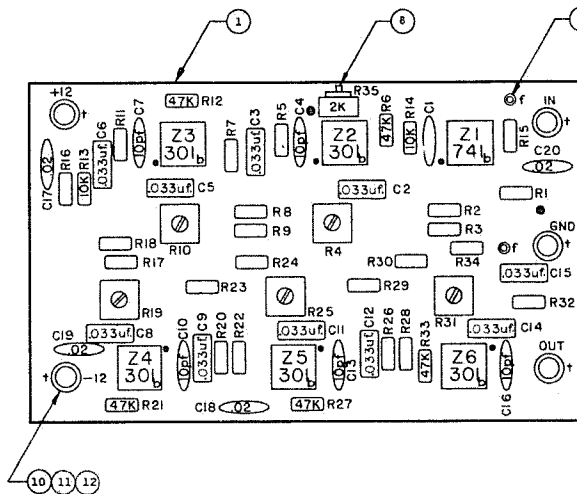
Mark-Space Bandpass Filter Board Subassembly
